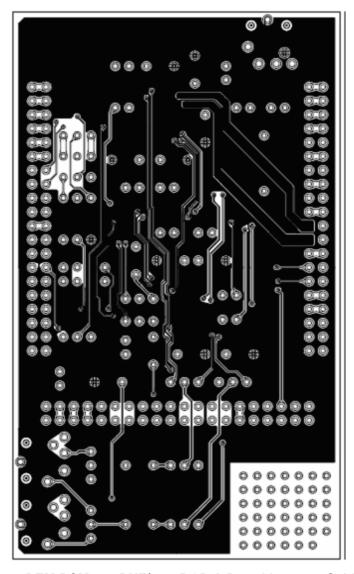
DEM-PCM1870RHF/1774RGP-A Board Layout—Solder Side
